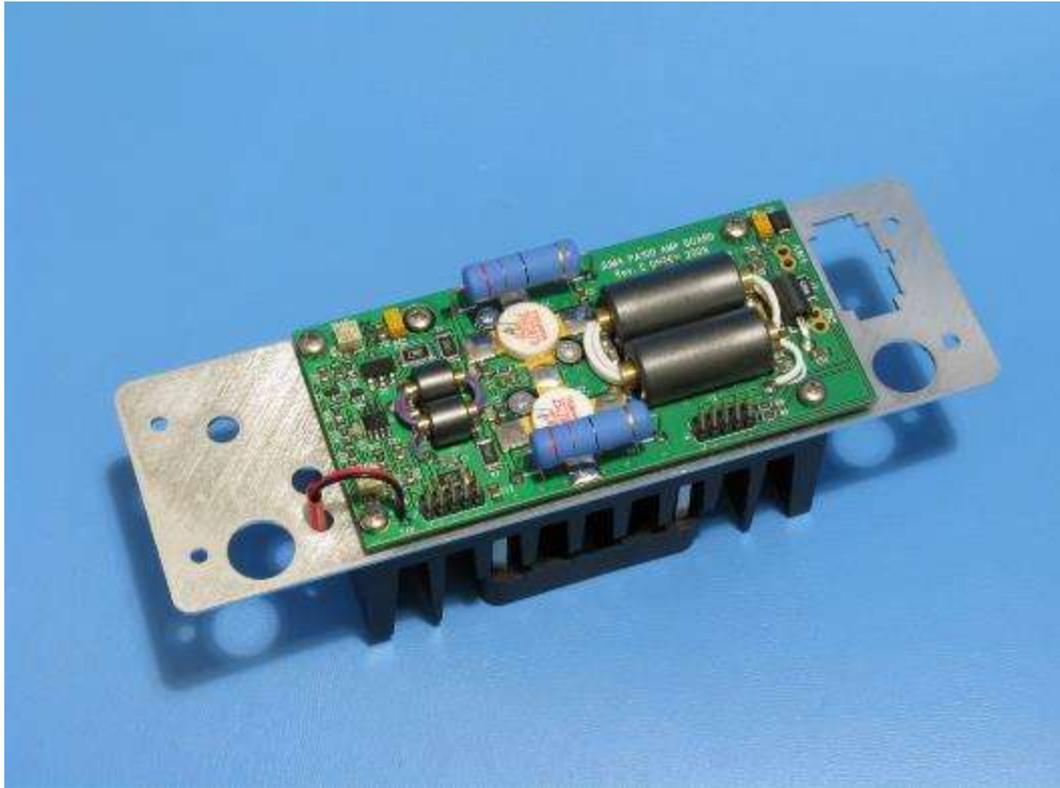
Check all the screws and solder Q3 legs. Solder the power resistors R5 and R6
